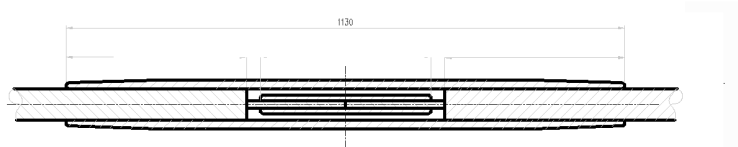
Schematic Diagram of Butt Joint Connecting Tube JYX-1520/125
